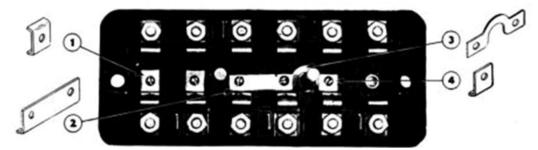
shows a composite assembly of a 6-pole PK-2 test block with auxiliary contacts and jumpers, as follows:
